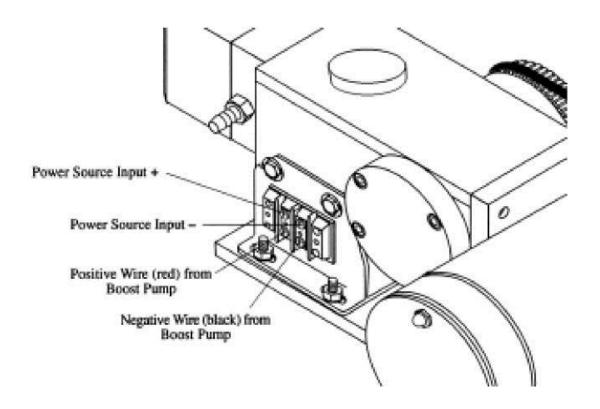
LTM (DC UNIT) Electrical Interface View
